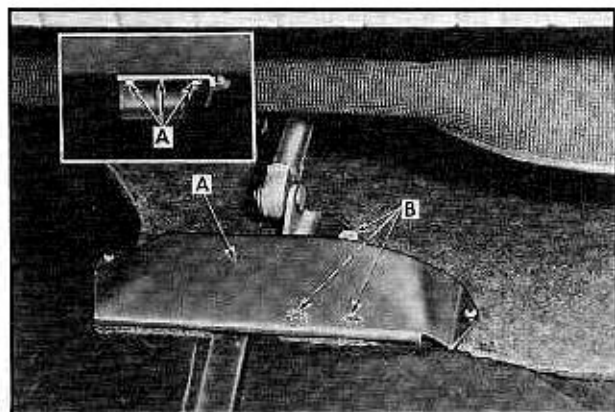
Horizontal Electric Regulator Removal (Sedans)
